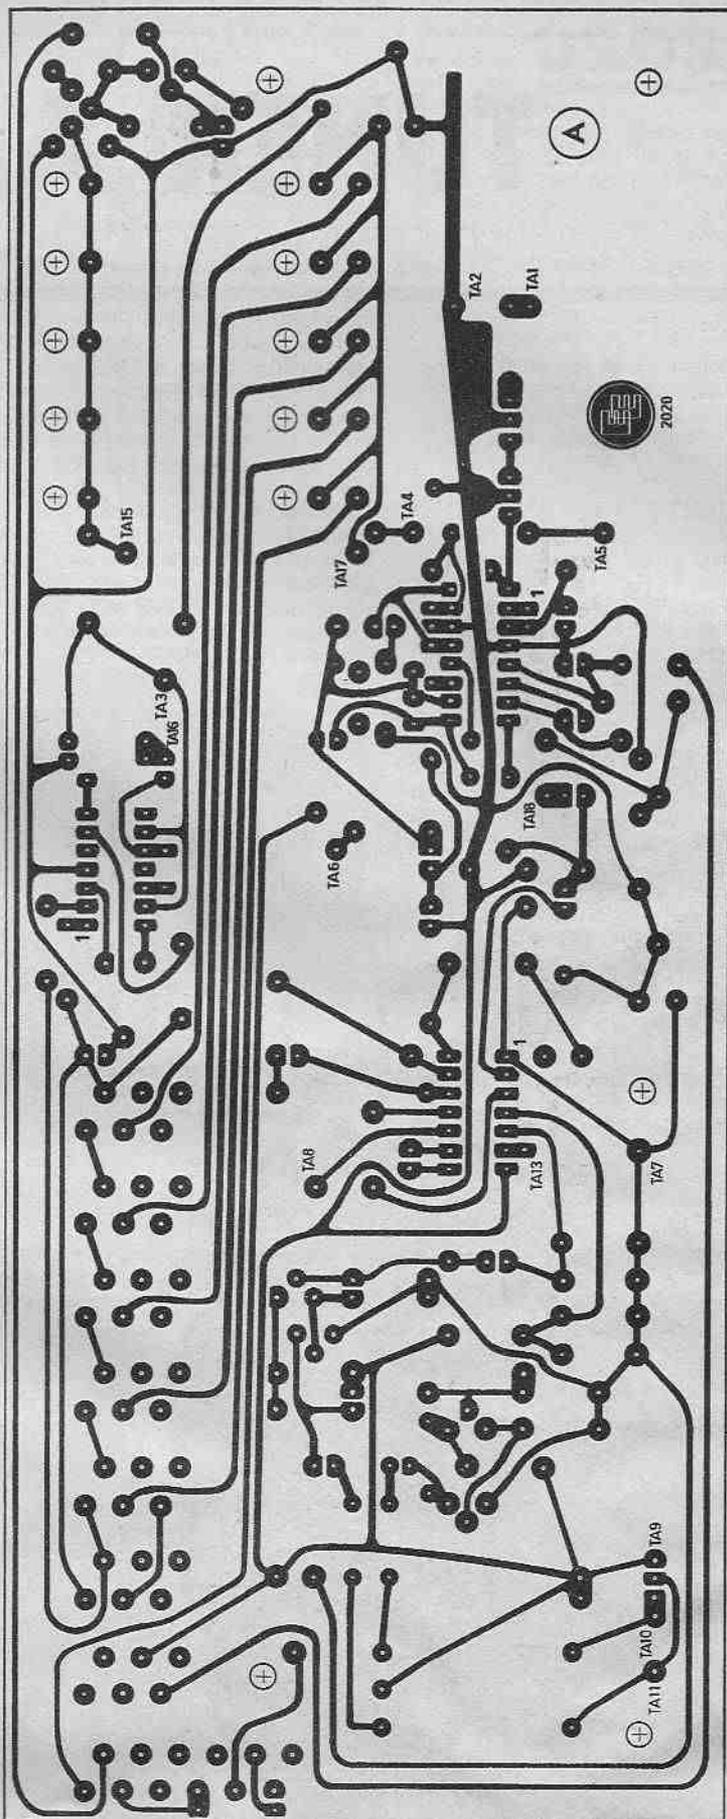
Board A of the 2020 Tuner Amplifier: underside view showing printed circuit (full size).
